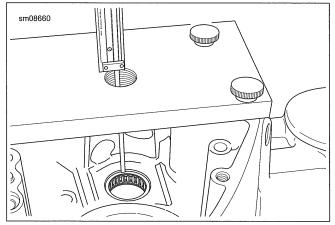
Measure from Top of Support Plate to Edge of Needle Bearing
